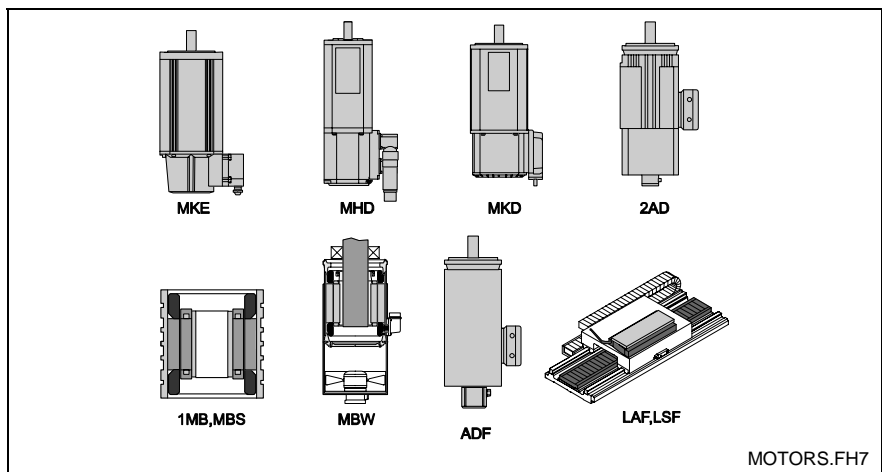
Motors used with Diax 04 and EcoDrive 03
